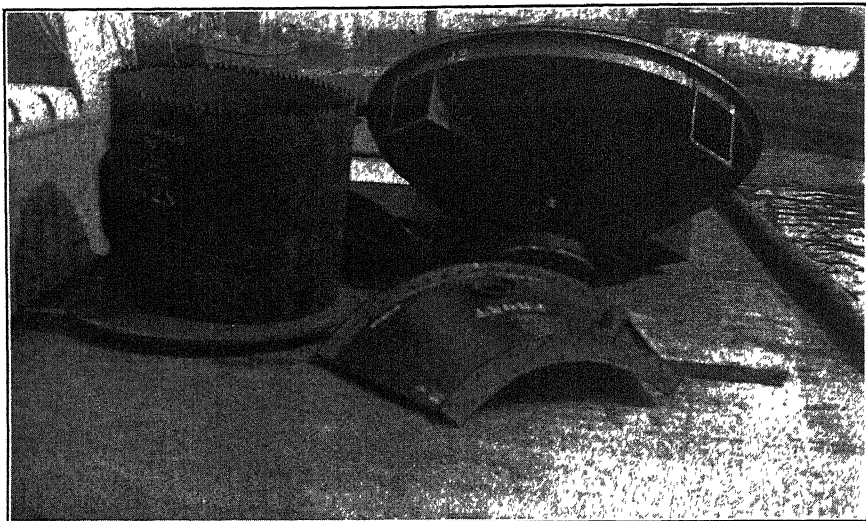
Parts of a 10 ft. 6 in. diam. vacuum pan. The bottom piece is 11 ft. 3 in. diam. \times 4 ft. 0 in. deep and weighs 6,500 lb.
